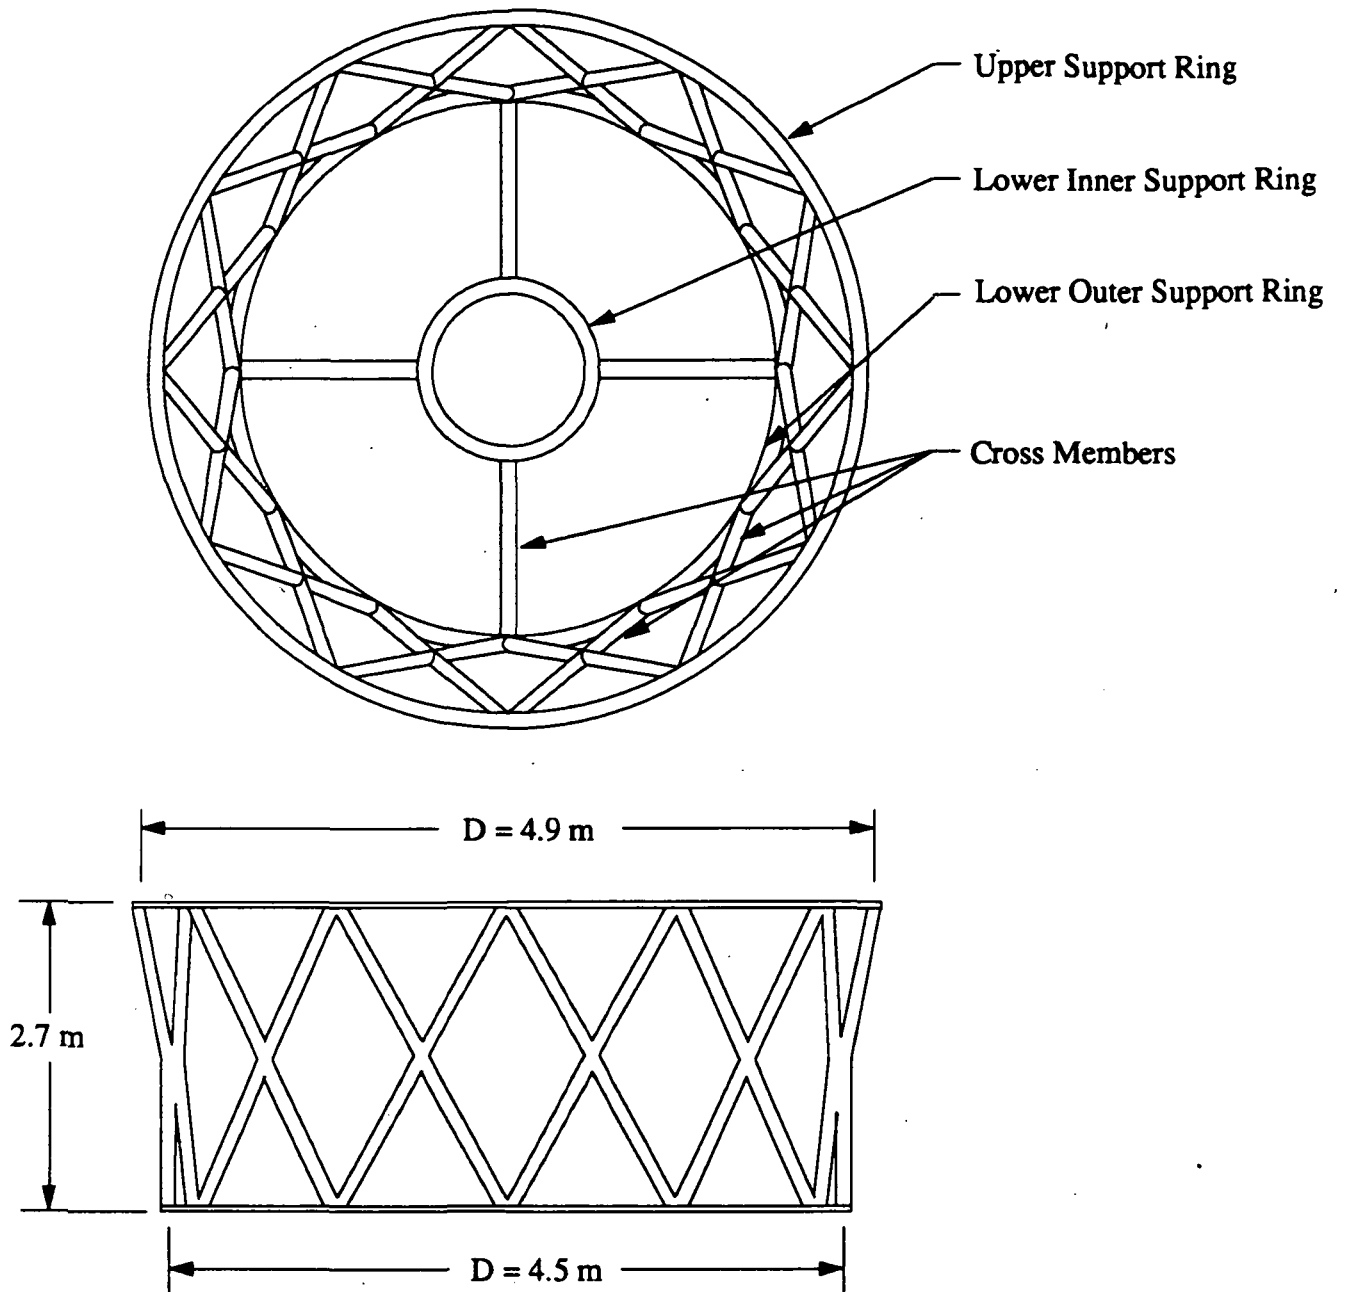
Schematic of Engine Return Unit (ERU) internal framing.
